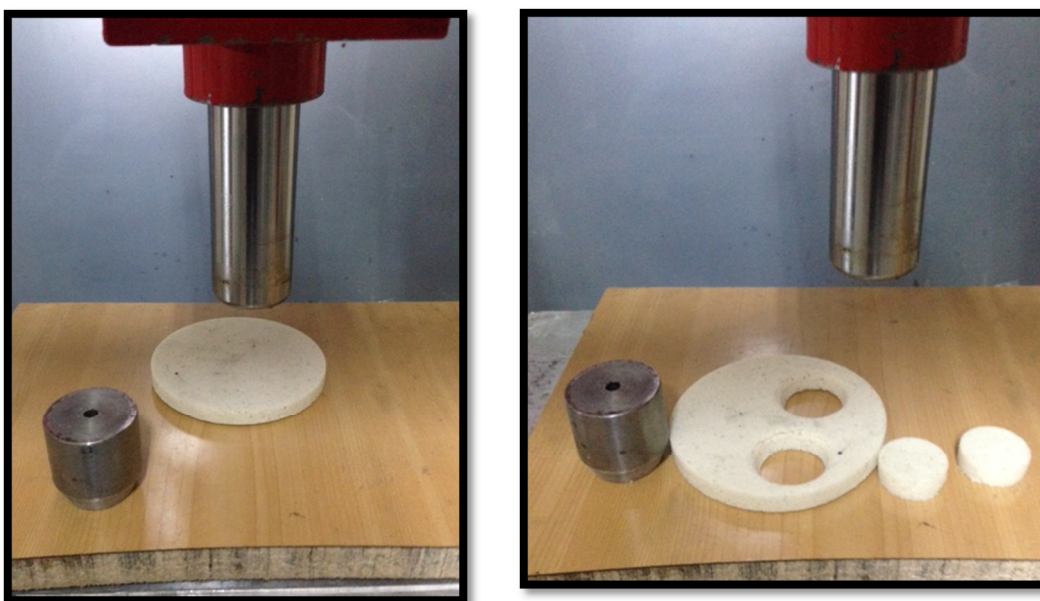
Hand press for shaping to diameter 29 mm.
